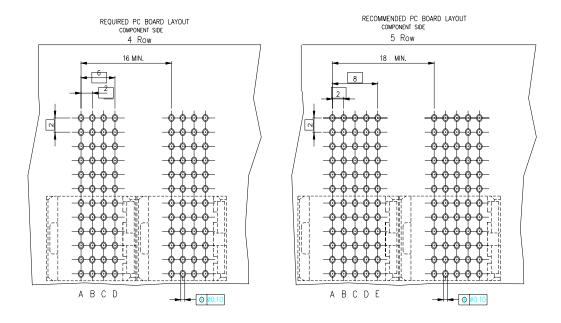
Required board layout for press fit vertical header. (All dimensions in mm)
